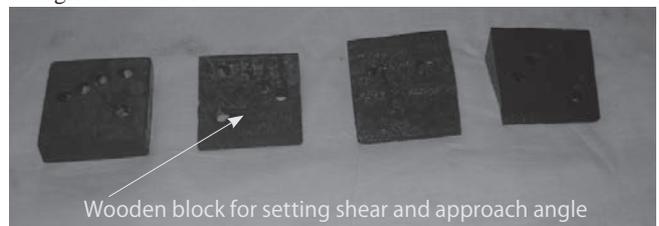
Tapered wooden block for adjusting shear and approach angle of cutter blade
